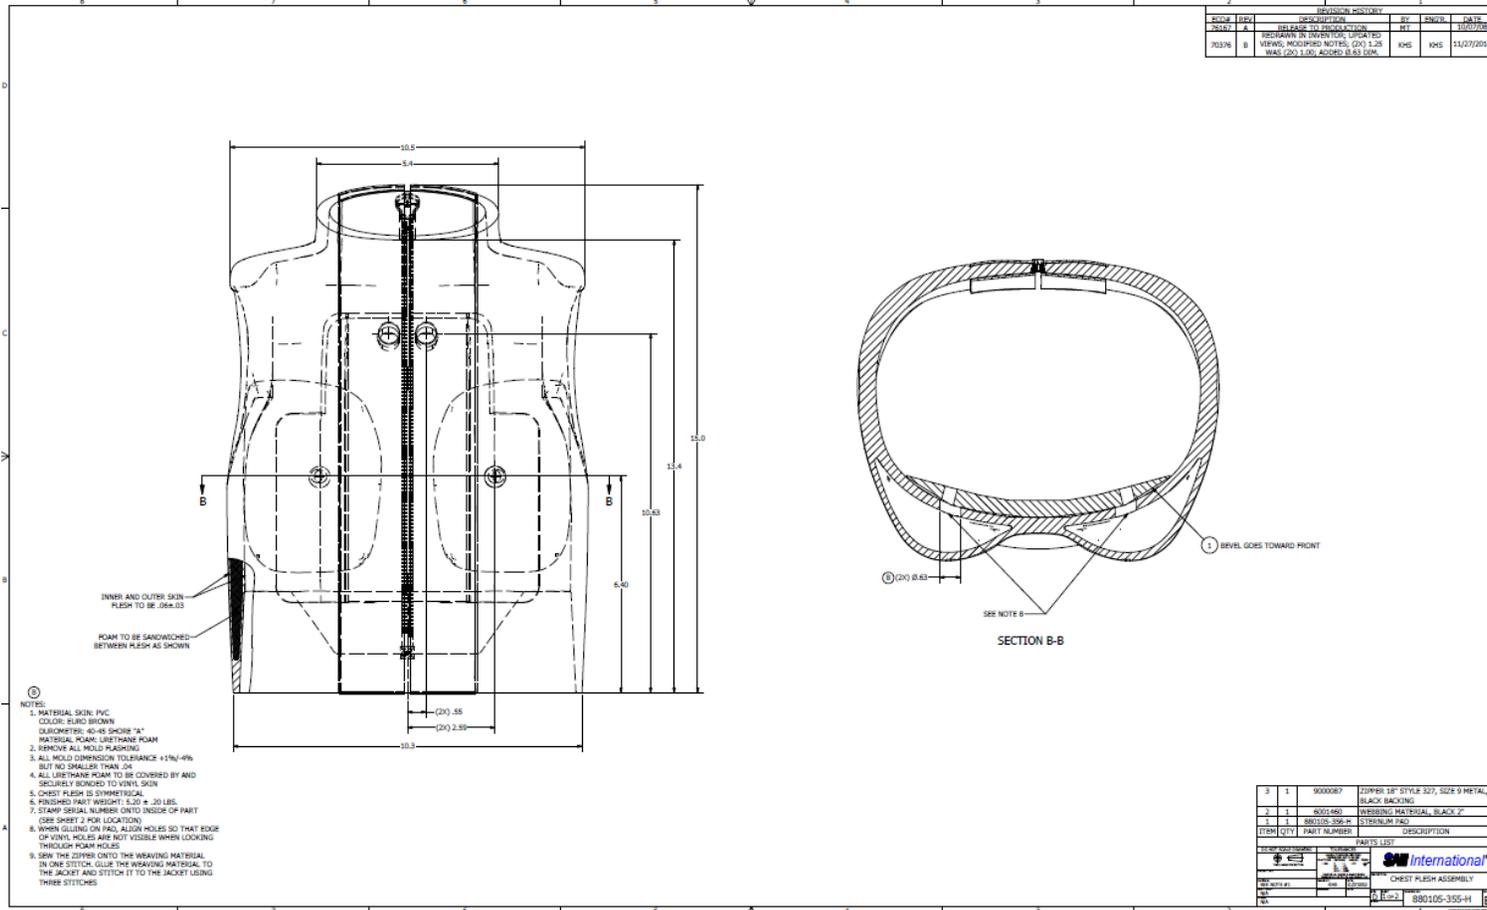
FRONT VIEW CHEST JACKET DRAWING
